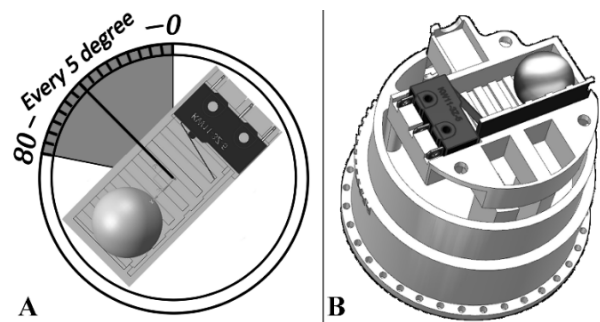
Sensor parts of the device and sensor angle adjustment method with angle indicator. (a) The sensor is set at 45°. (b) Image of the sensor using the metal bead and microswitch, sensor angle indicator, and its socket
